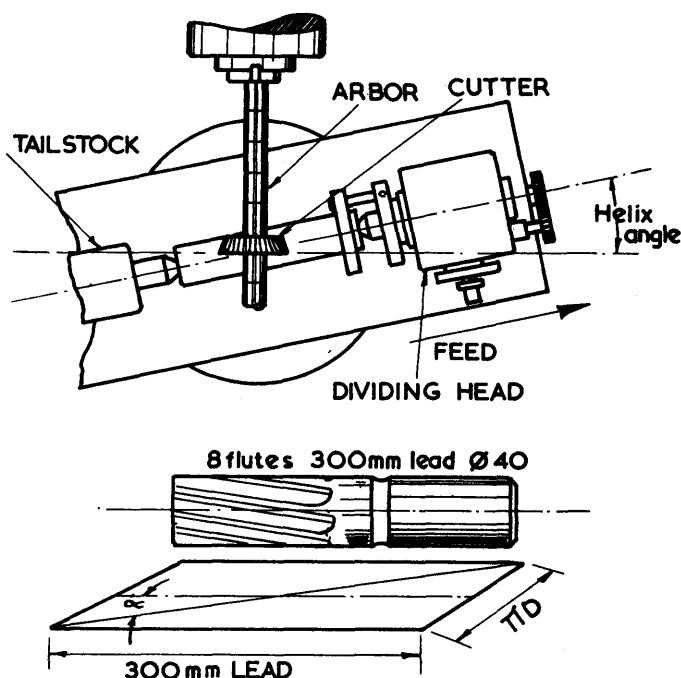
Need for Angular Setting of Table when Spiral Milling.
